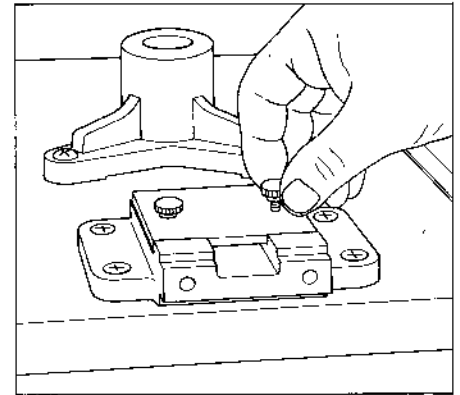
Removing Thumbscrews from Plastic Wire Retaining Plate
